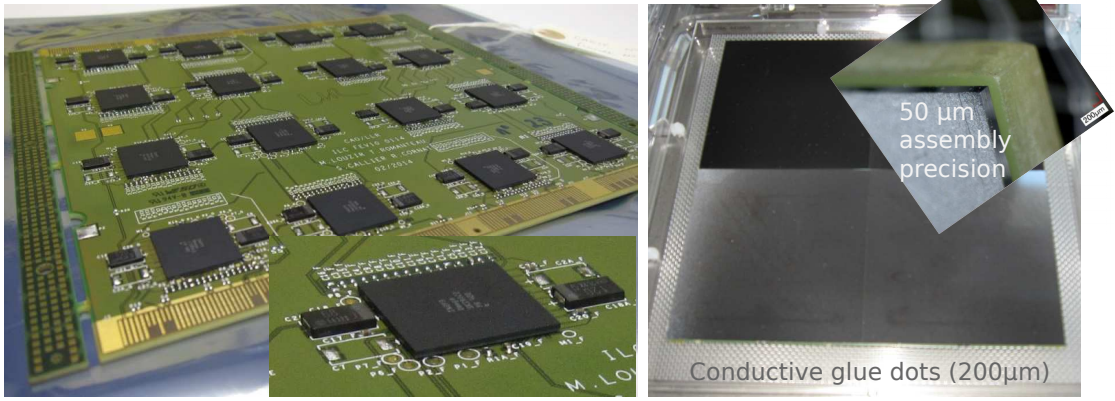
Left: new PCB with 16 SKIROC chips and 1024 channels, right: 4 sensors aligned and prepared for robotic gluing to PCB.
